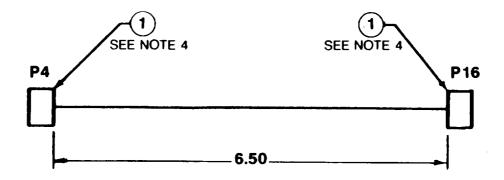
Special Relay Assembly to Static Exciter Assembly Wiring Harness, Drawing No. 72-2220
